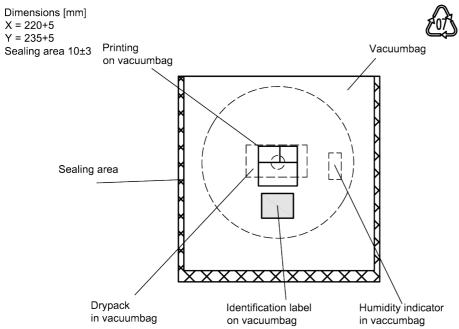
Drawing of moisture barrier bag (MBB) for reel with diameter of 180 mm.
